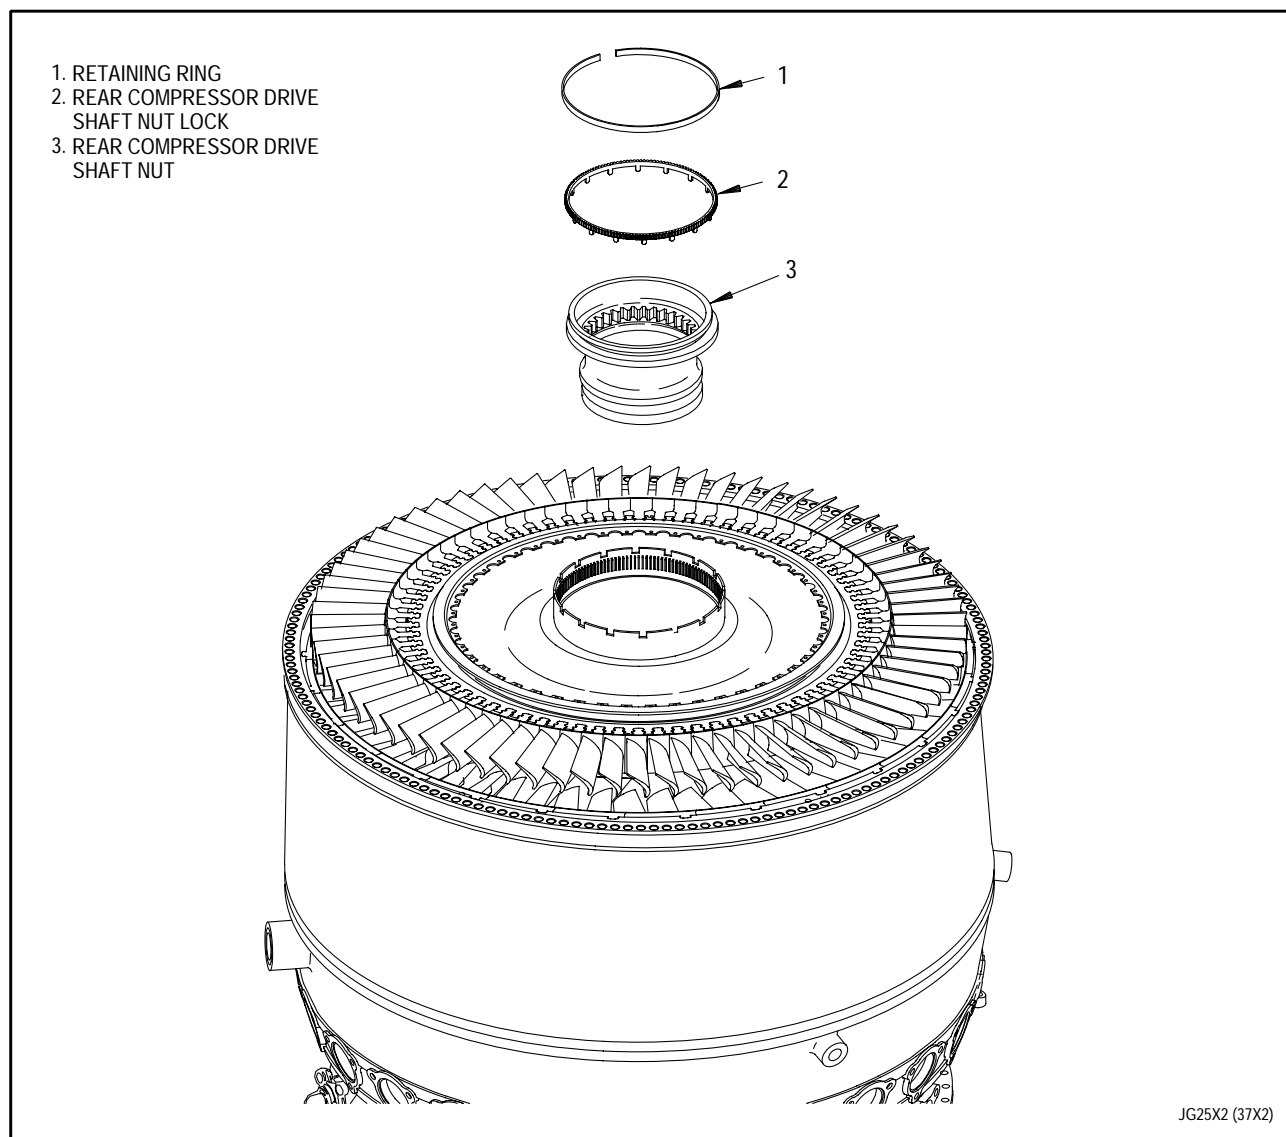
Retaining Ring and Rear Compressor Driveshaft Nut Lock - Installation
